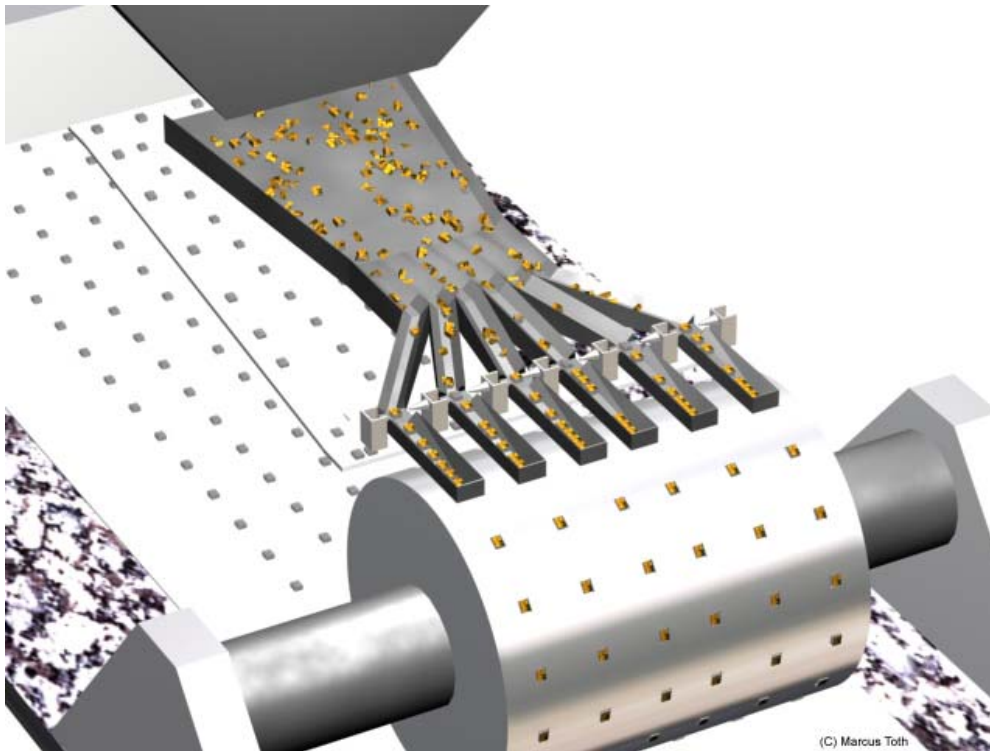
Illustration of fluidic self-assembly technique used for automatic placement of very small semiconductor die.
